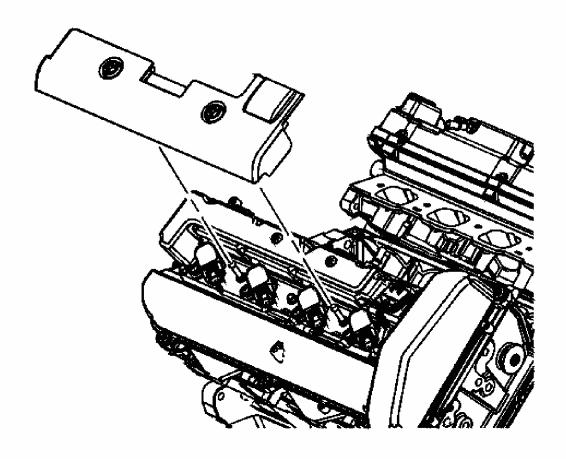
Identifying Ignition Coil Assembly Sight Shield Cover Courtesy of GENERAL MOTORS CORP.
